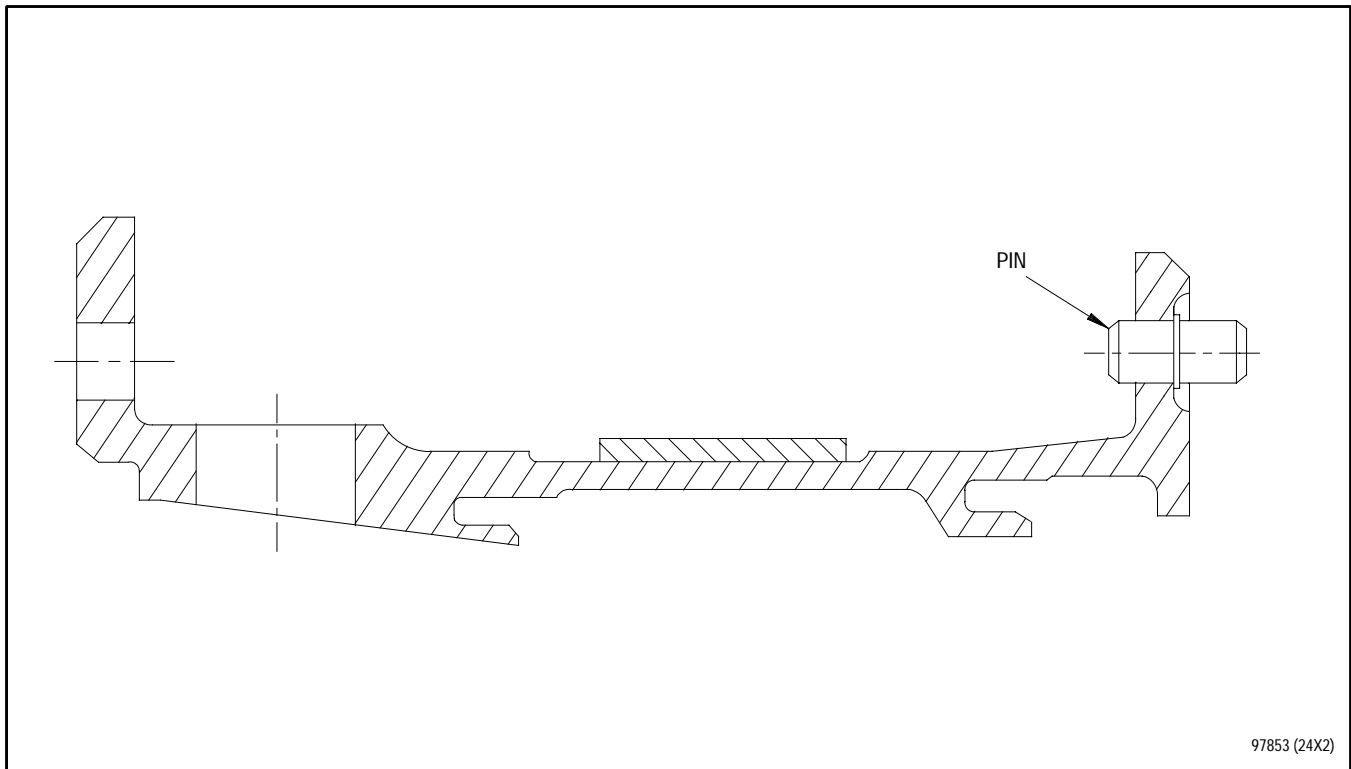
Fourth Stage Compressor Case Assembly - Pin Replacement
